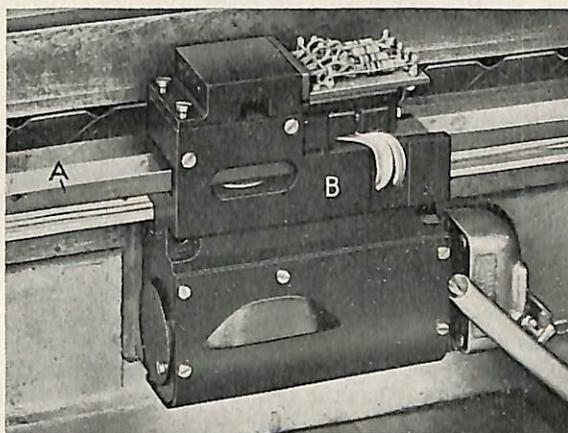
Close-up View of the Diffraction-grating System for the Table of the Milling Machine
